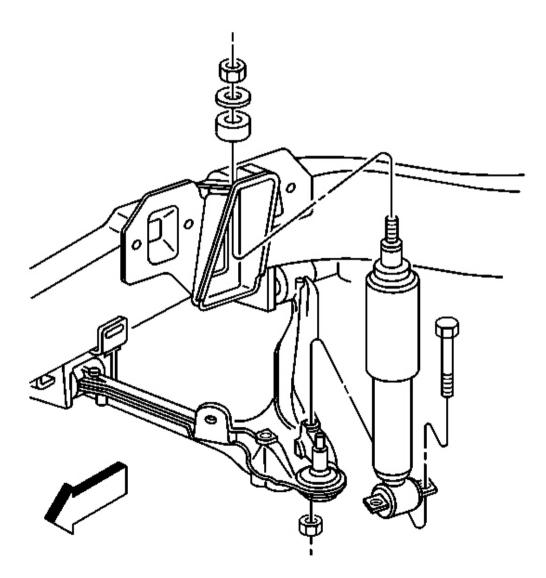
Lower Shock Absorber & Bolts Courtesy of GENERAL MOTORS CORP.
